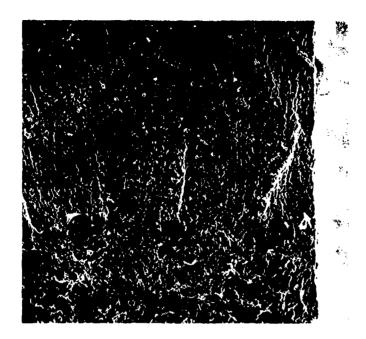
Fatigue fracture surface of temper-embrittled A-514 weldment containing LOP, 70x.
